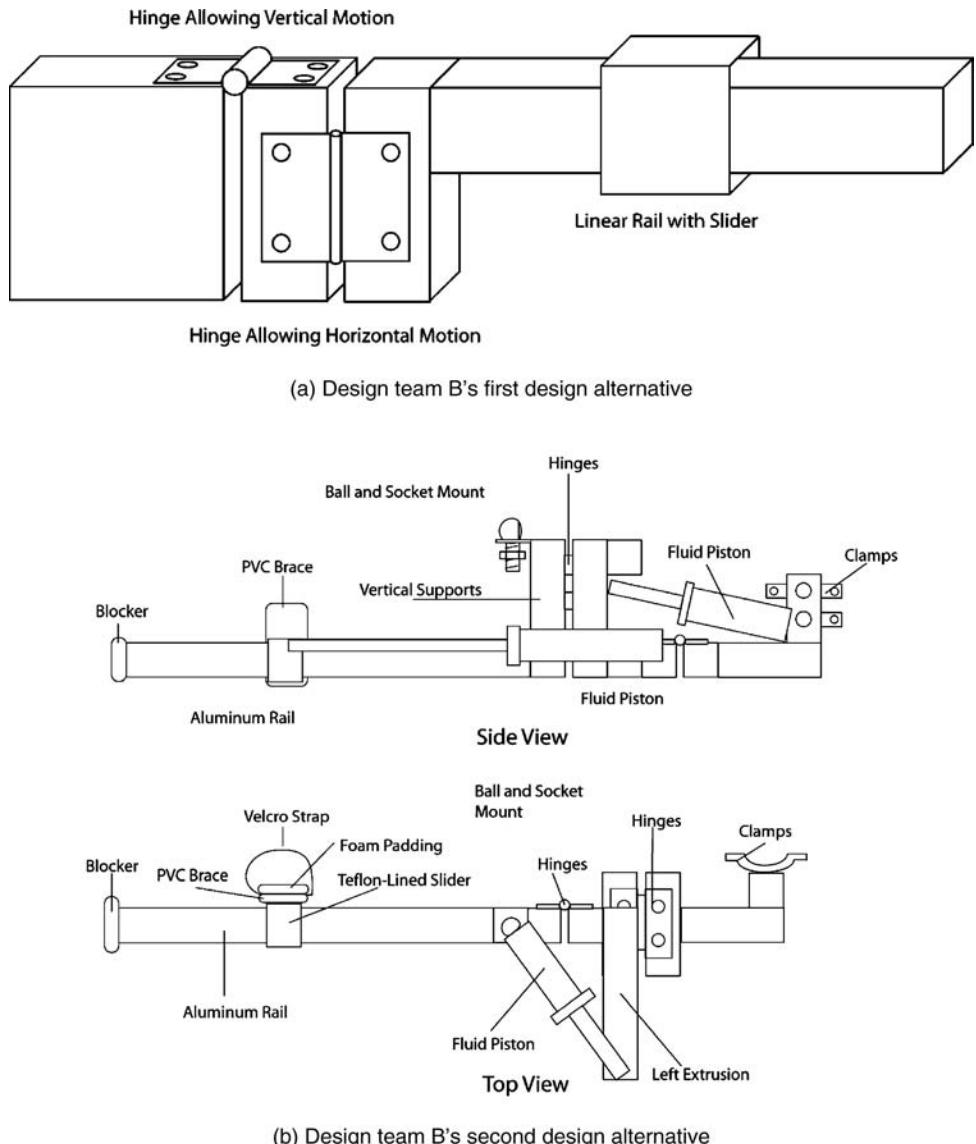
Design drawings for the design alternatives produced by team B for the Danbury arm support. Adapted from Best et al. (2007).
